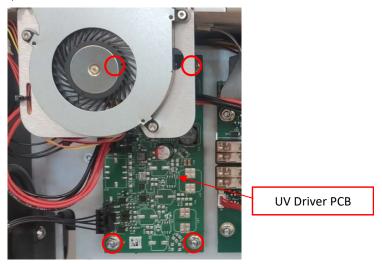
4x (5.5mm Driver) UV Driver PCB retaining nuts.
